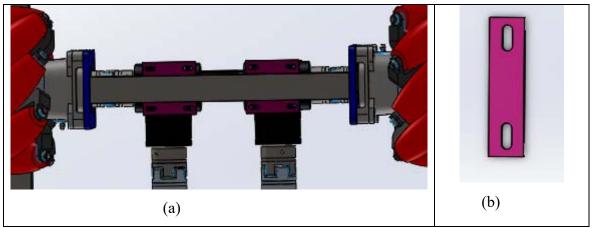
(a) Assembly with bevel gear with its mounting part (b) 3D-CAD model of a bevel mounting part.
